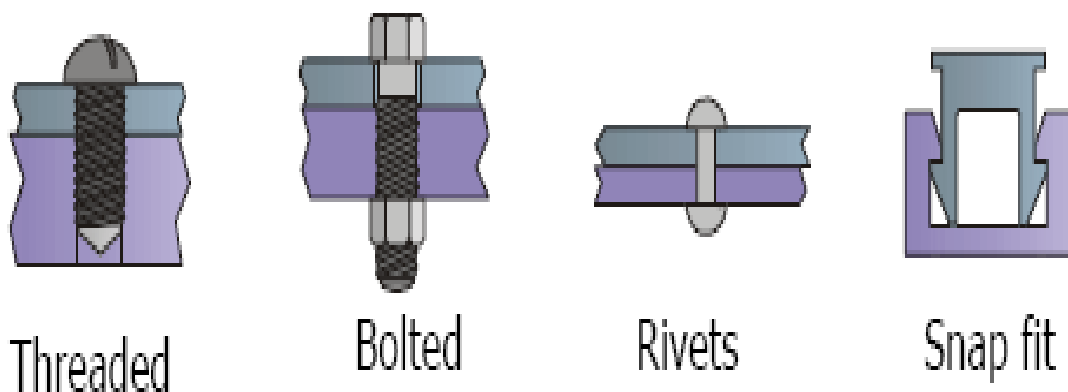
Schematic presentation of five mechanical joints: threaded, Bolted, rivets, Snap fit
